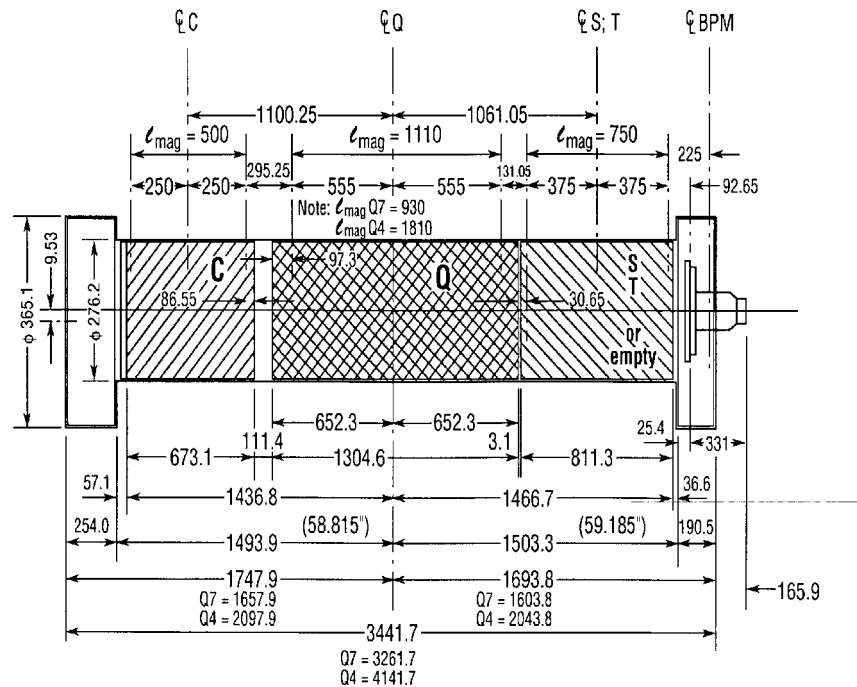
Corrector, quadrupole, sextupole (CQS) assembly. Lamination length is shown (dimensions in mm).
